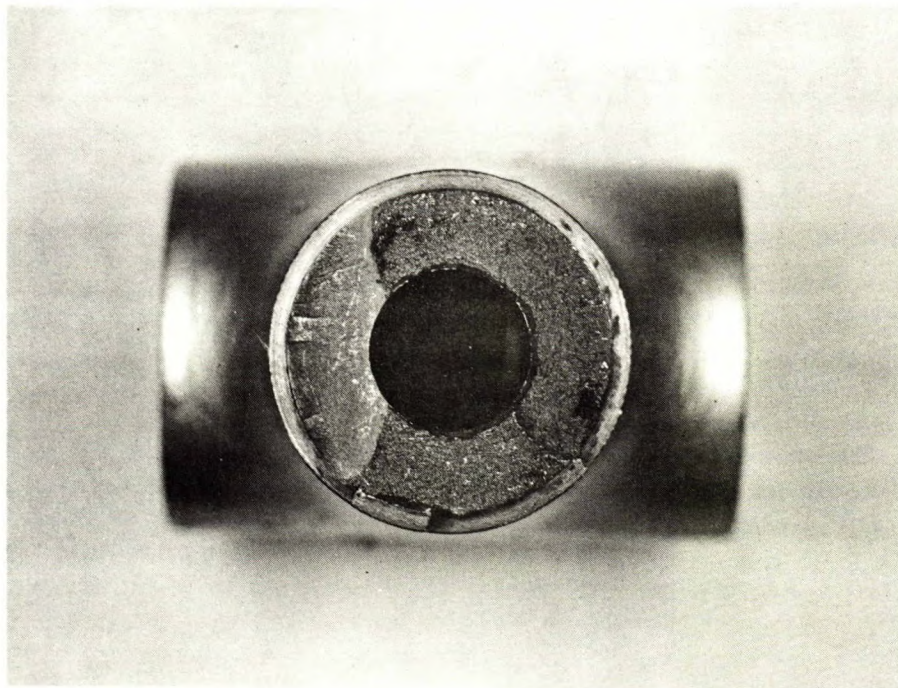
Fracture Face, Port Front Fitting, CF-BHW.
